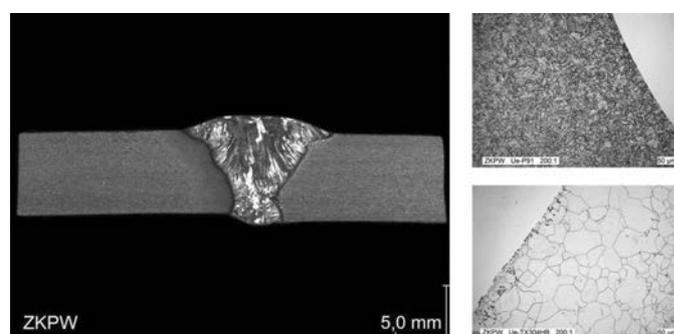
Grade 91 to Super 304H dissimilar joint welded with Thermanit Nicro 82
